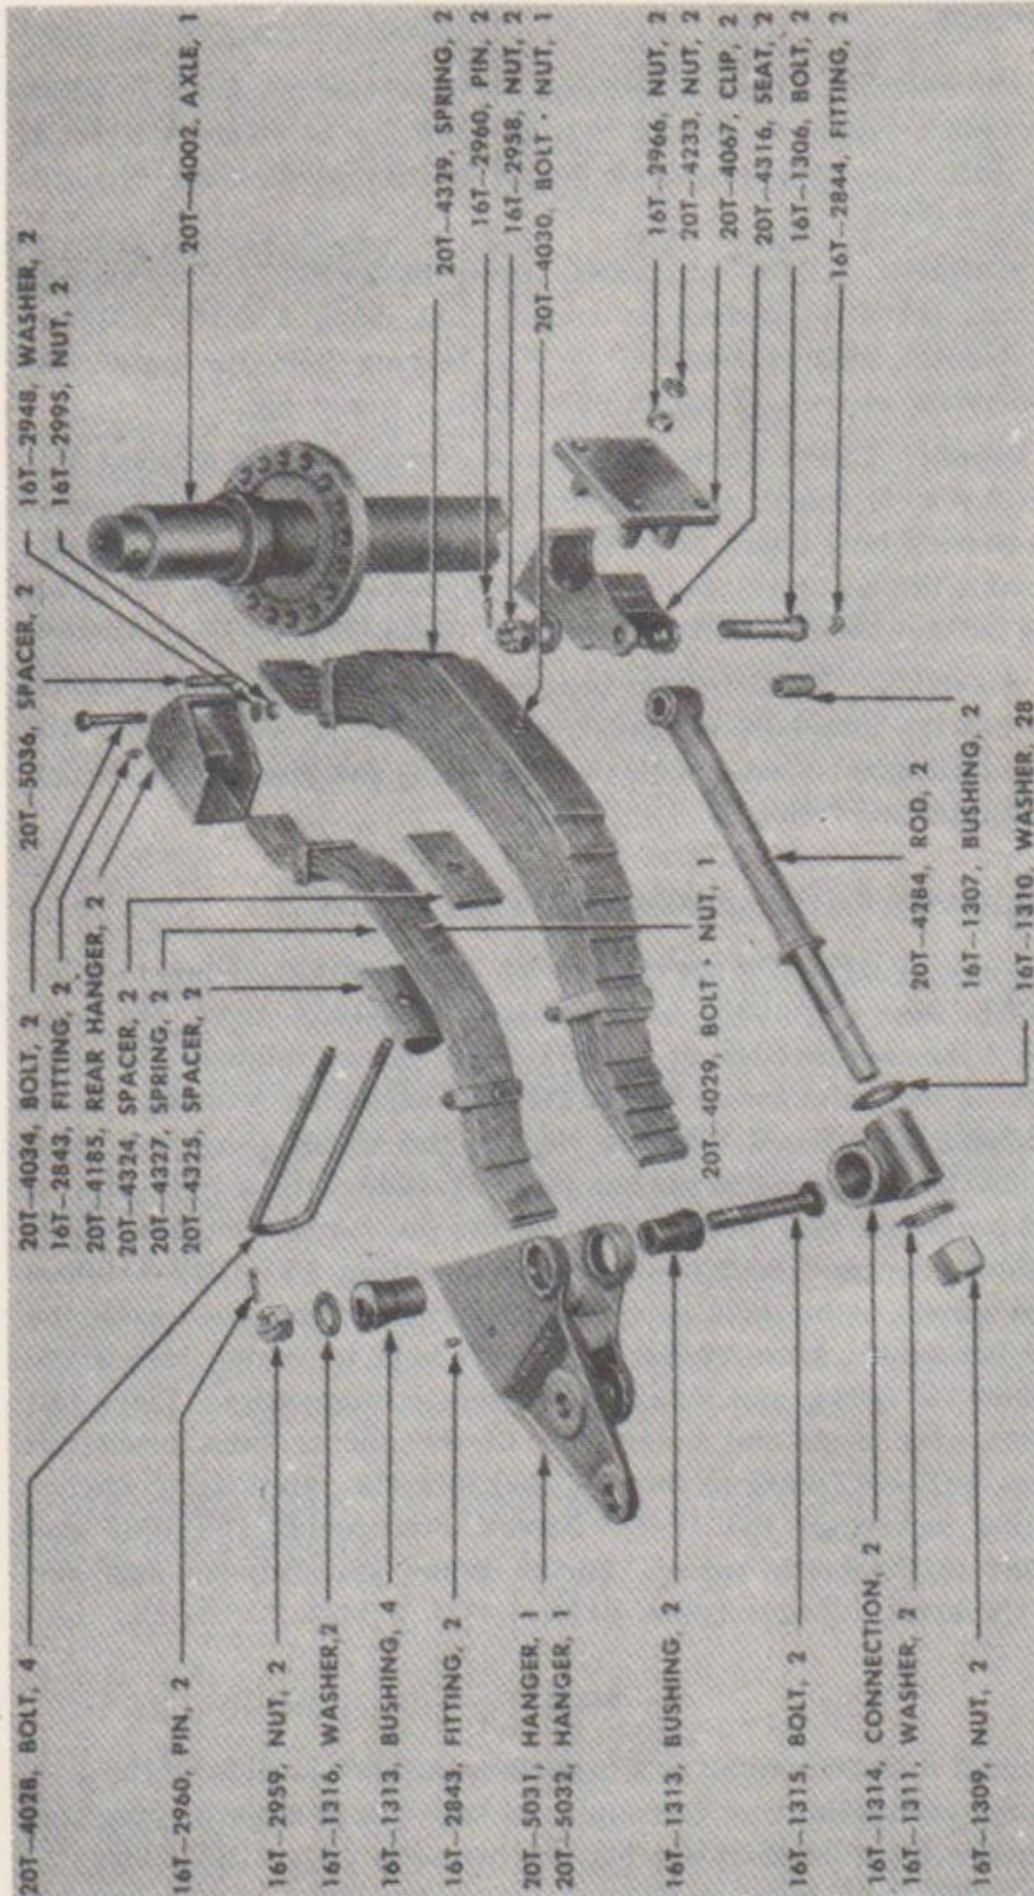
DOLLY UNDERCONSTRUCTION—EXPLODED VIEW
